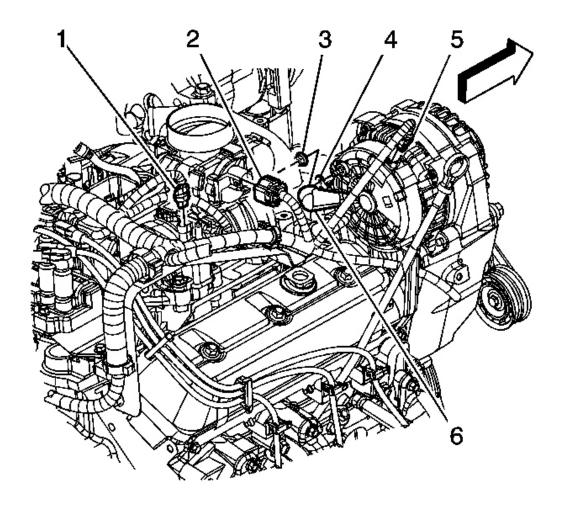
View Of Engine Wiring Harness & Components Courtesy of GENERAL MOTORS CORP.
